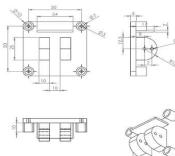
Force pressure sensor holder 1 with Syringe Drawing
